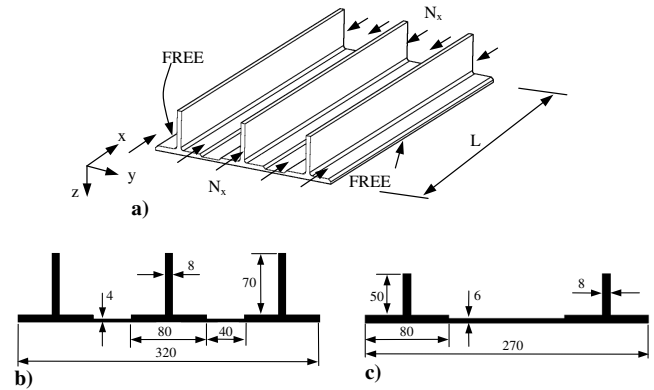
Panel geometry and boundary conditions: a) Isometric view. Cross sections of b) 3-blade-stiffened panel, and c) 2-blade-stiffened panel. All dimensions are in mm.
